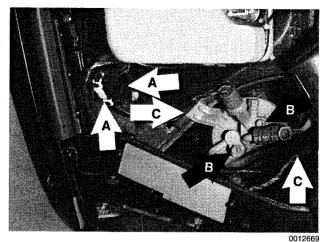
A/C receiver/drier electrical harness connectors (A), pressure line retaining bolts (B), and mounting bolts (C).
